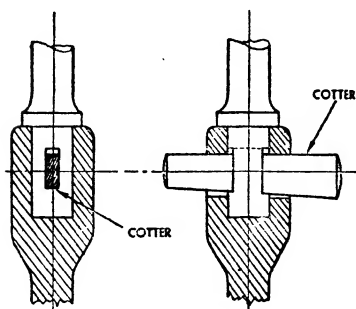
Common form of cotter of the type widely used to hold together moving parts of an engine or machine.
